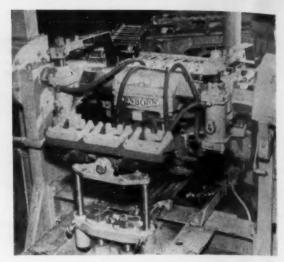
Three complete cores are shown on a dryer after the rollover has deposited them on a stand and has rocked back to pick up the next set.
